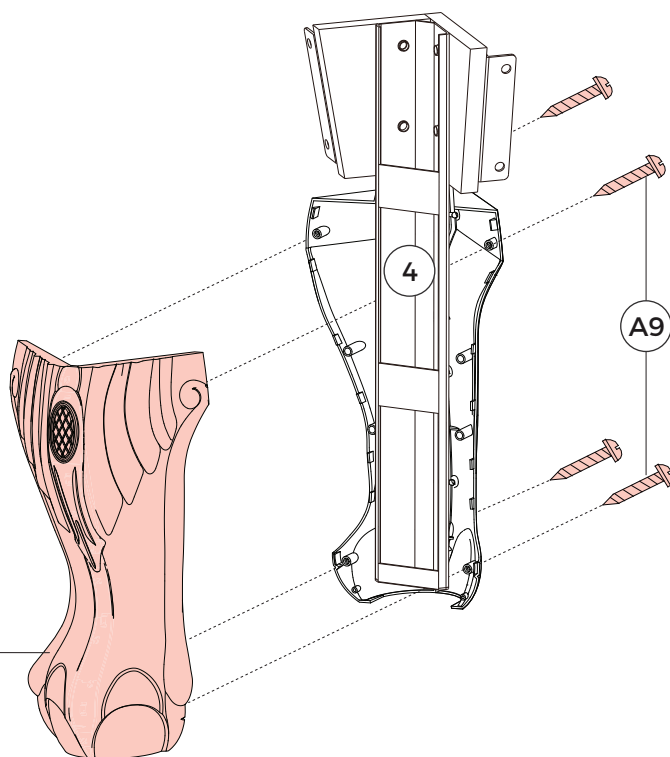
Assembly / Ensamblaje FIG. 5 / FIG. 5 Assemblage
